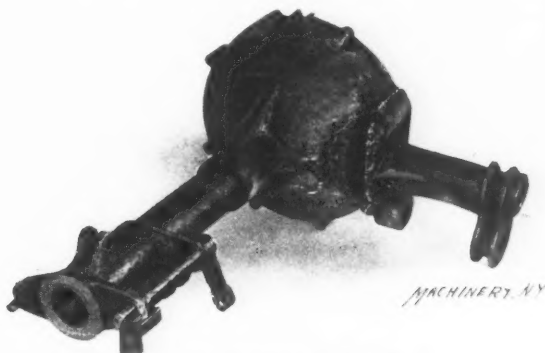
Welded Cast Iron Automobile Gear Case.
